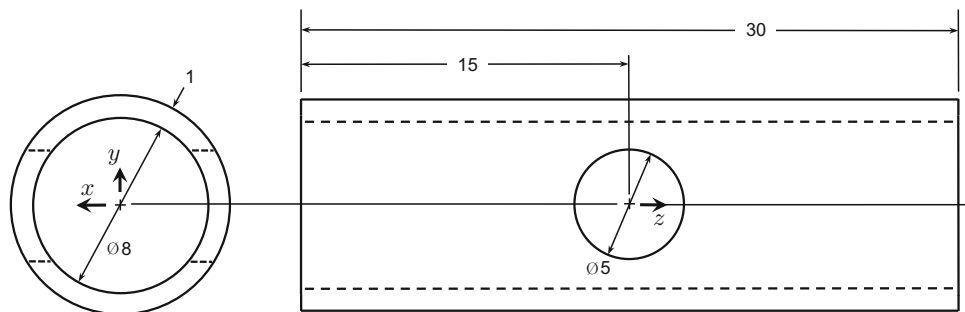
Dimensions of the example macroscale structure, a tube with side-holes. A rectilinear coordinate system  $(x\ y\ z)$  is identified.
